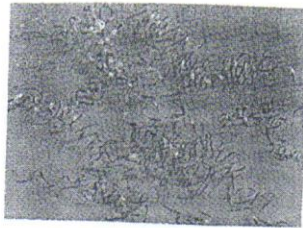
a. Shape of chip for machining the matrix specimen at a cutting speed of 112 m/min, feed of 0.2 mm/rev and depth of cut 0.25 mm using a coated carbide tool.
